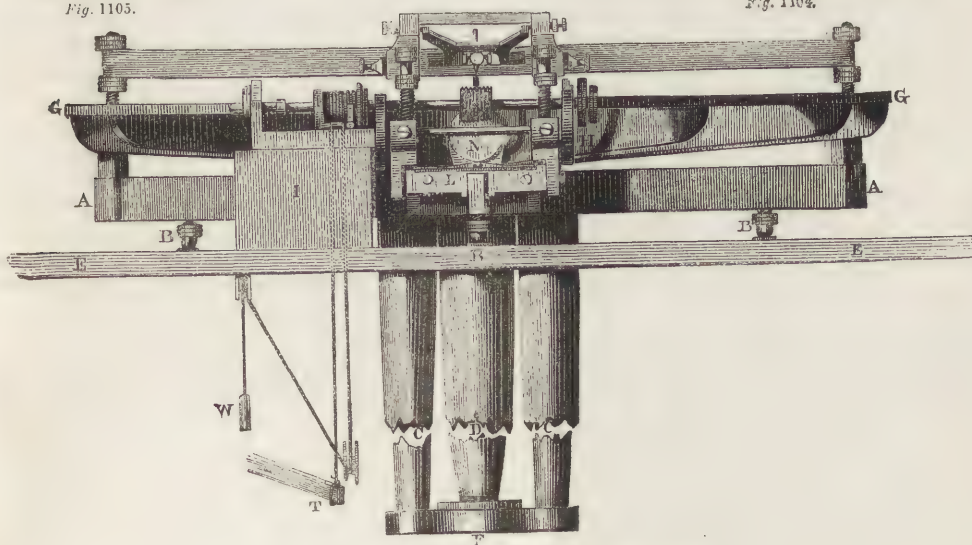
ELEVATION OF TROUGHTON'S DIVIDING ENGINE.
